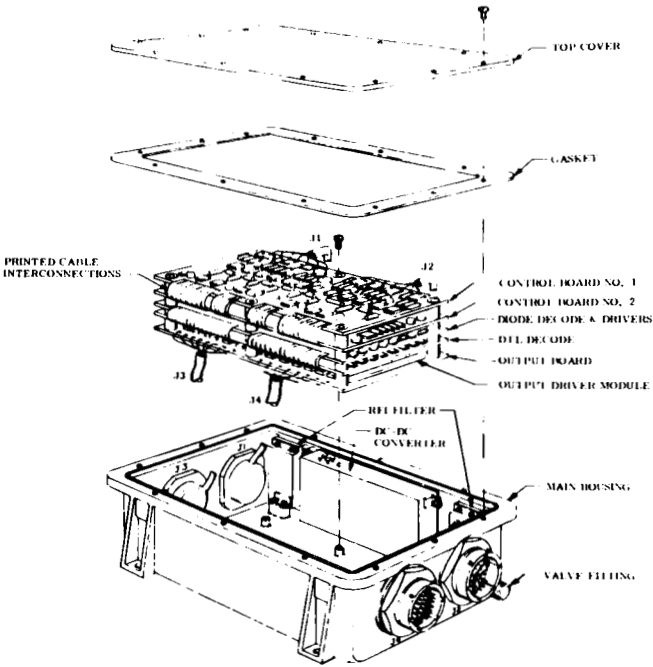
SWITCH SELECTOR ASSEMBLY
